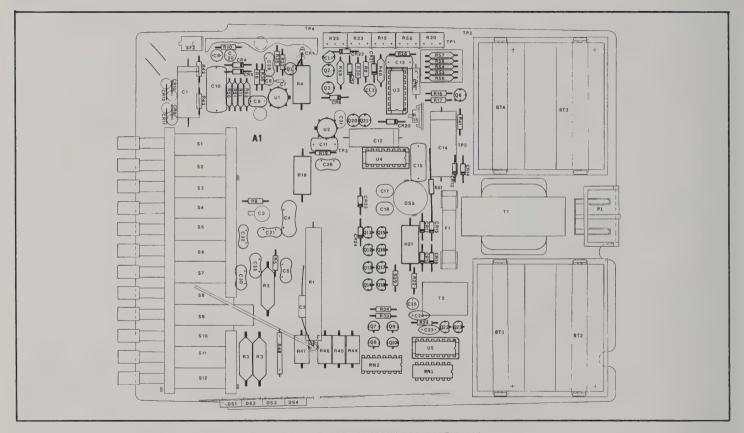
8000A-01 MAIN PCB ASSEMBLY
